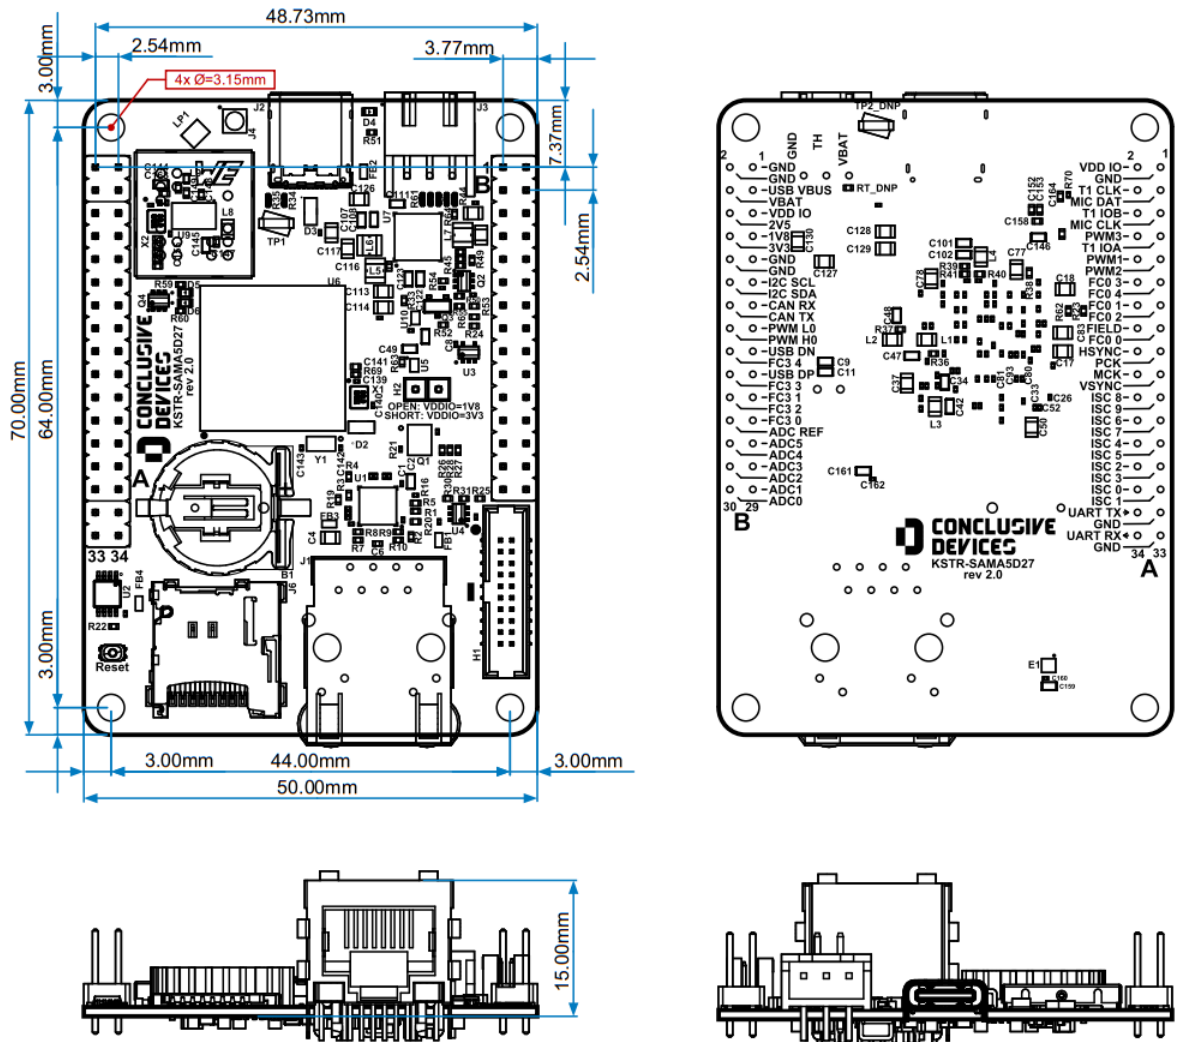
KSTR-SAMA5D27 Top View Mechanics in millimeters
